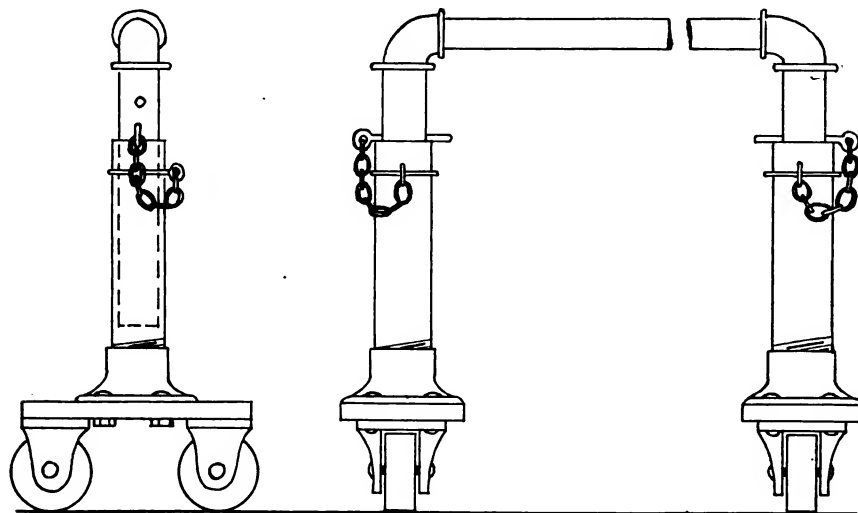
A GEAR TRESTLE STRONG ENOUGH TO CARRY THE LARGEST GEARS
